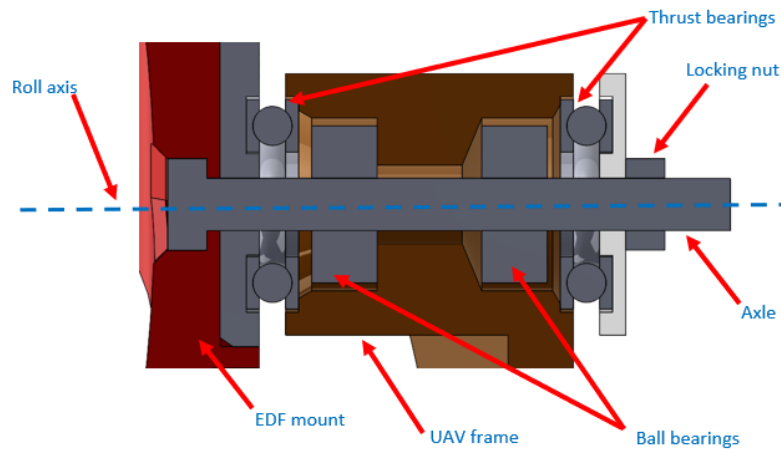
Internal arrangement of the EDF axle and roller bearing housing.
